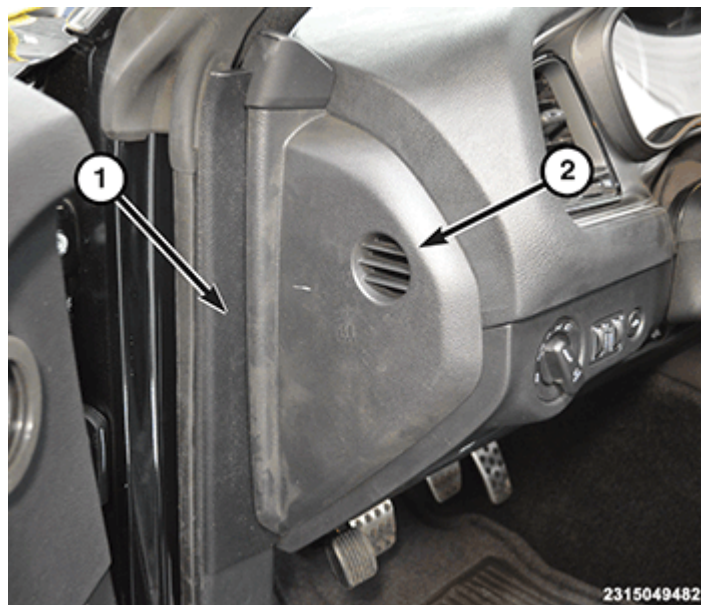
A-Pillar Extension & Instrument Panel End Cap
